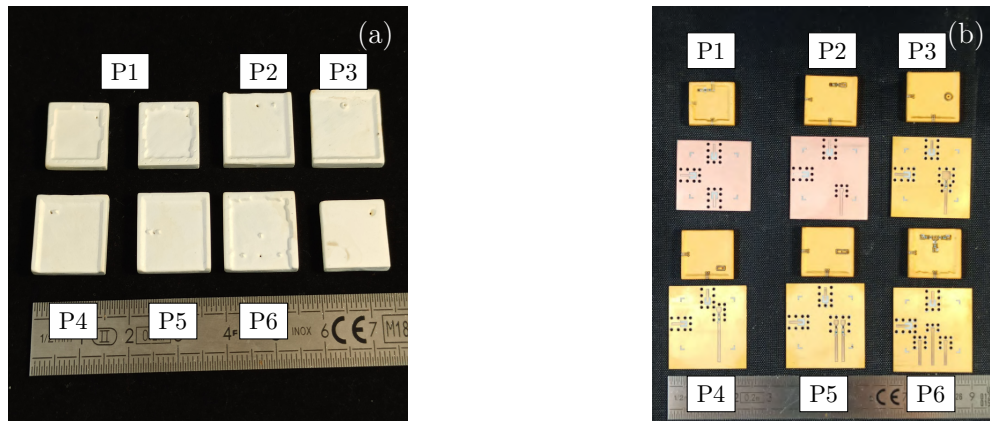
Manufactured 3-D printed ceramic resonators and PCB carrier boards without metallization (a) and metallized with all the components surface-mounted before the final assembly (b).
